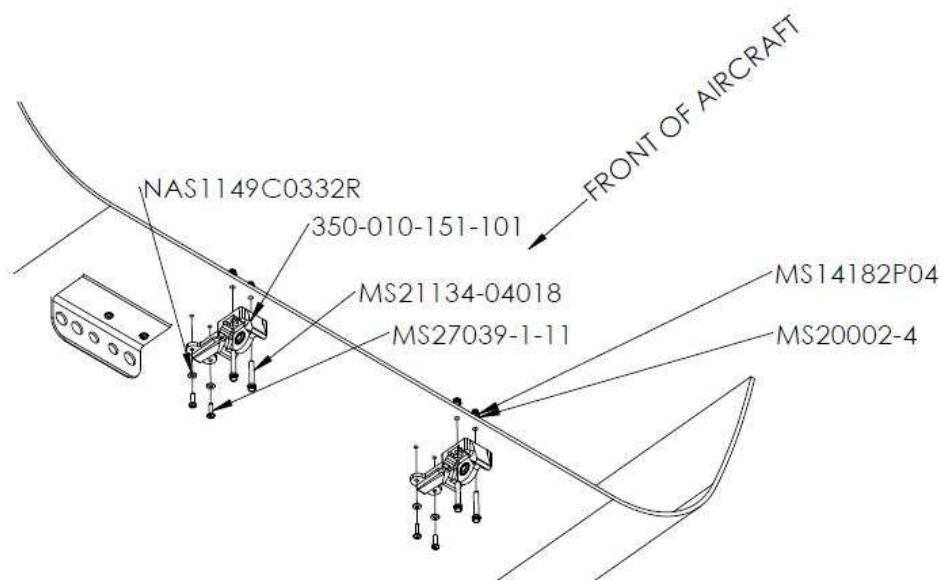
Aircraft Mounts (350-010-151-101, qty. 2) to be installed in the same manner described per BHT-407-II-5, pg. 4, section 1-3 “Cargo hook provisions (206-706-341-123/-125/-127/131) – installation”
